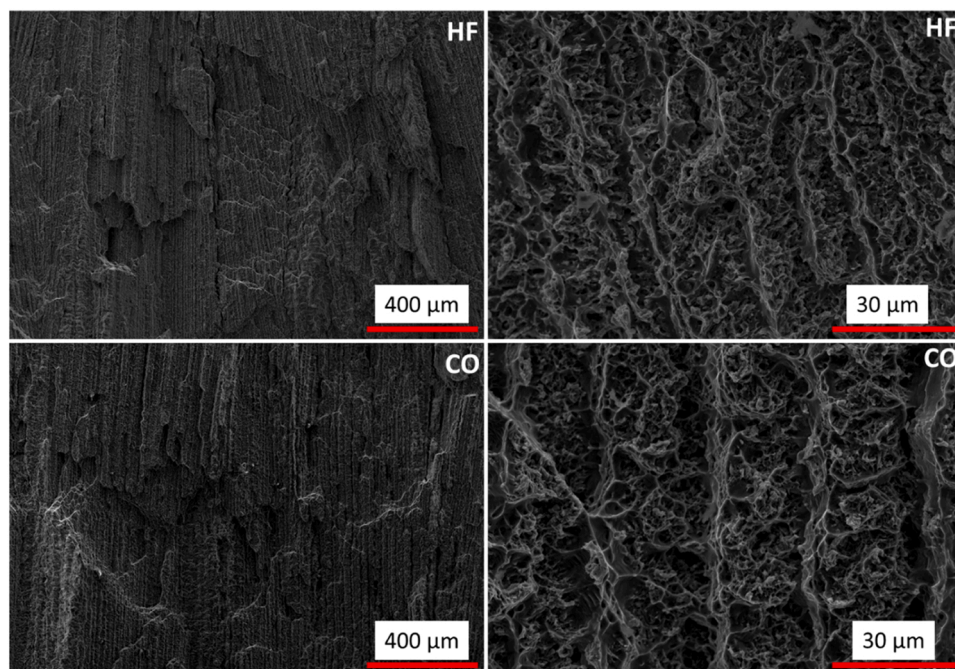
Fracture surfaces of the CO and HF horizontal tensile samples after the test.
